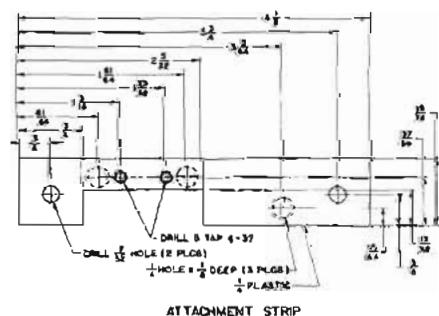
Construction and assembly details of the main capacitor dial magnifier.
